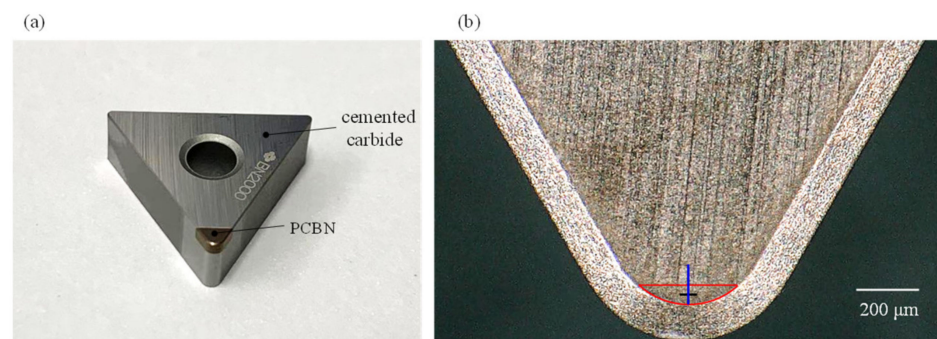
(a) PCBN cutting tools. (b) Optical microscope image of PCBN tool edge.
